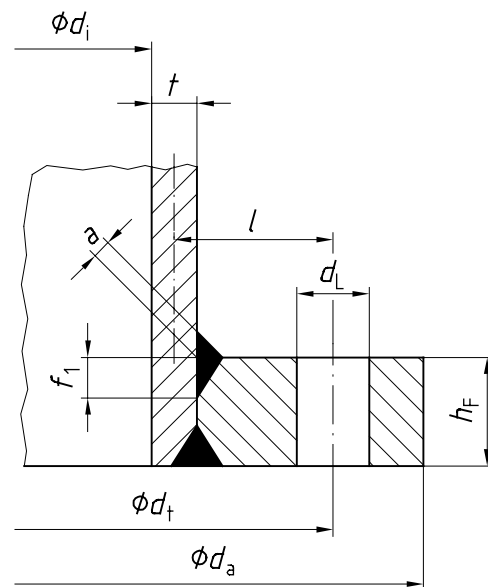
Welded-on full face flange (shown without gasket)
